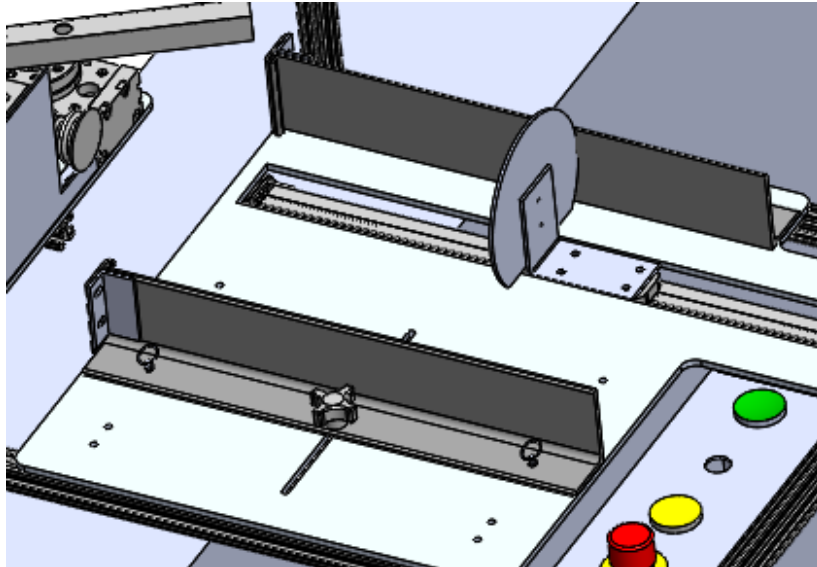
SOLIDWORKS assembly of the custom feeder mechanism
